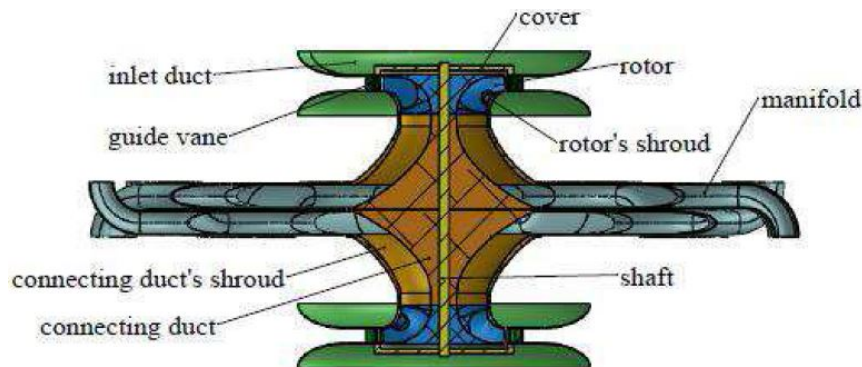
Three-position axially-sliding valve in the twin-rotor turbine [60]
